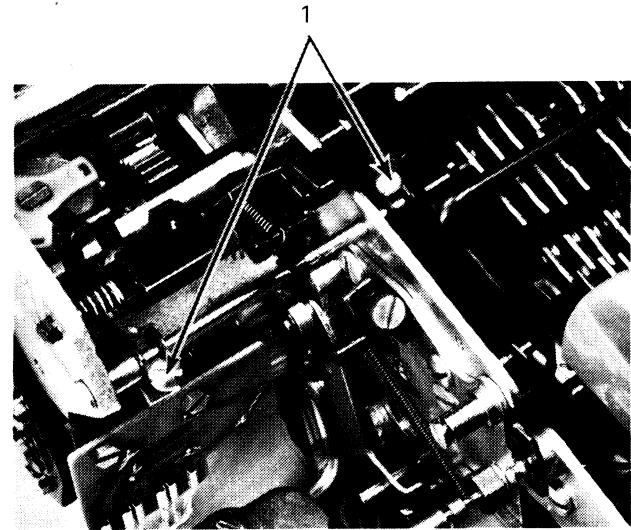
Keyboard Removal (Top, Left of Printer)
